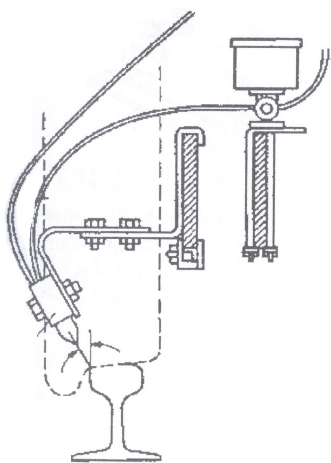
System of wheel flange lubrication – the indirect contactless type
